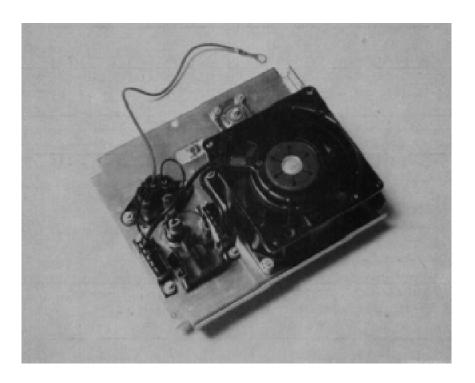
Sol-20 fan closure plate assembly. (Top of plate in foreground.)
